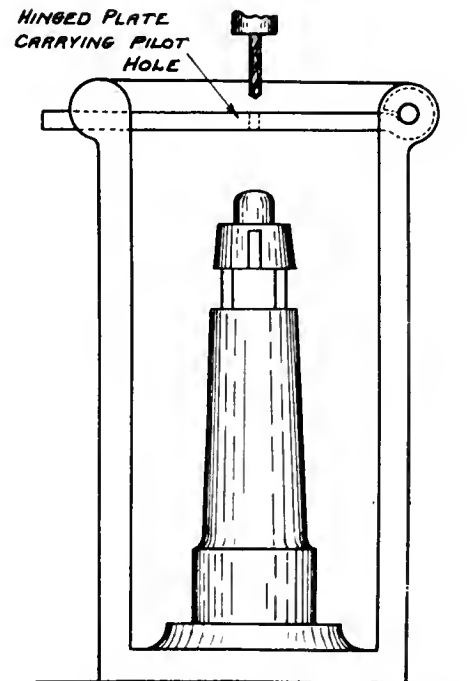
JIG ON DRILL PRESS TABLE FOR CENTERING BASES FOR TURNING ON "LO-SWING" LATHE.
